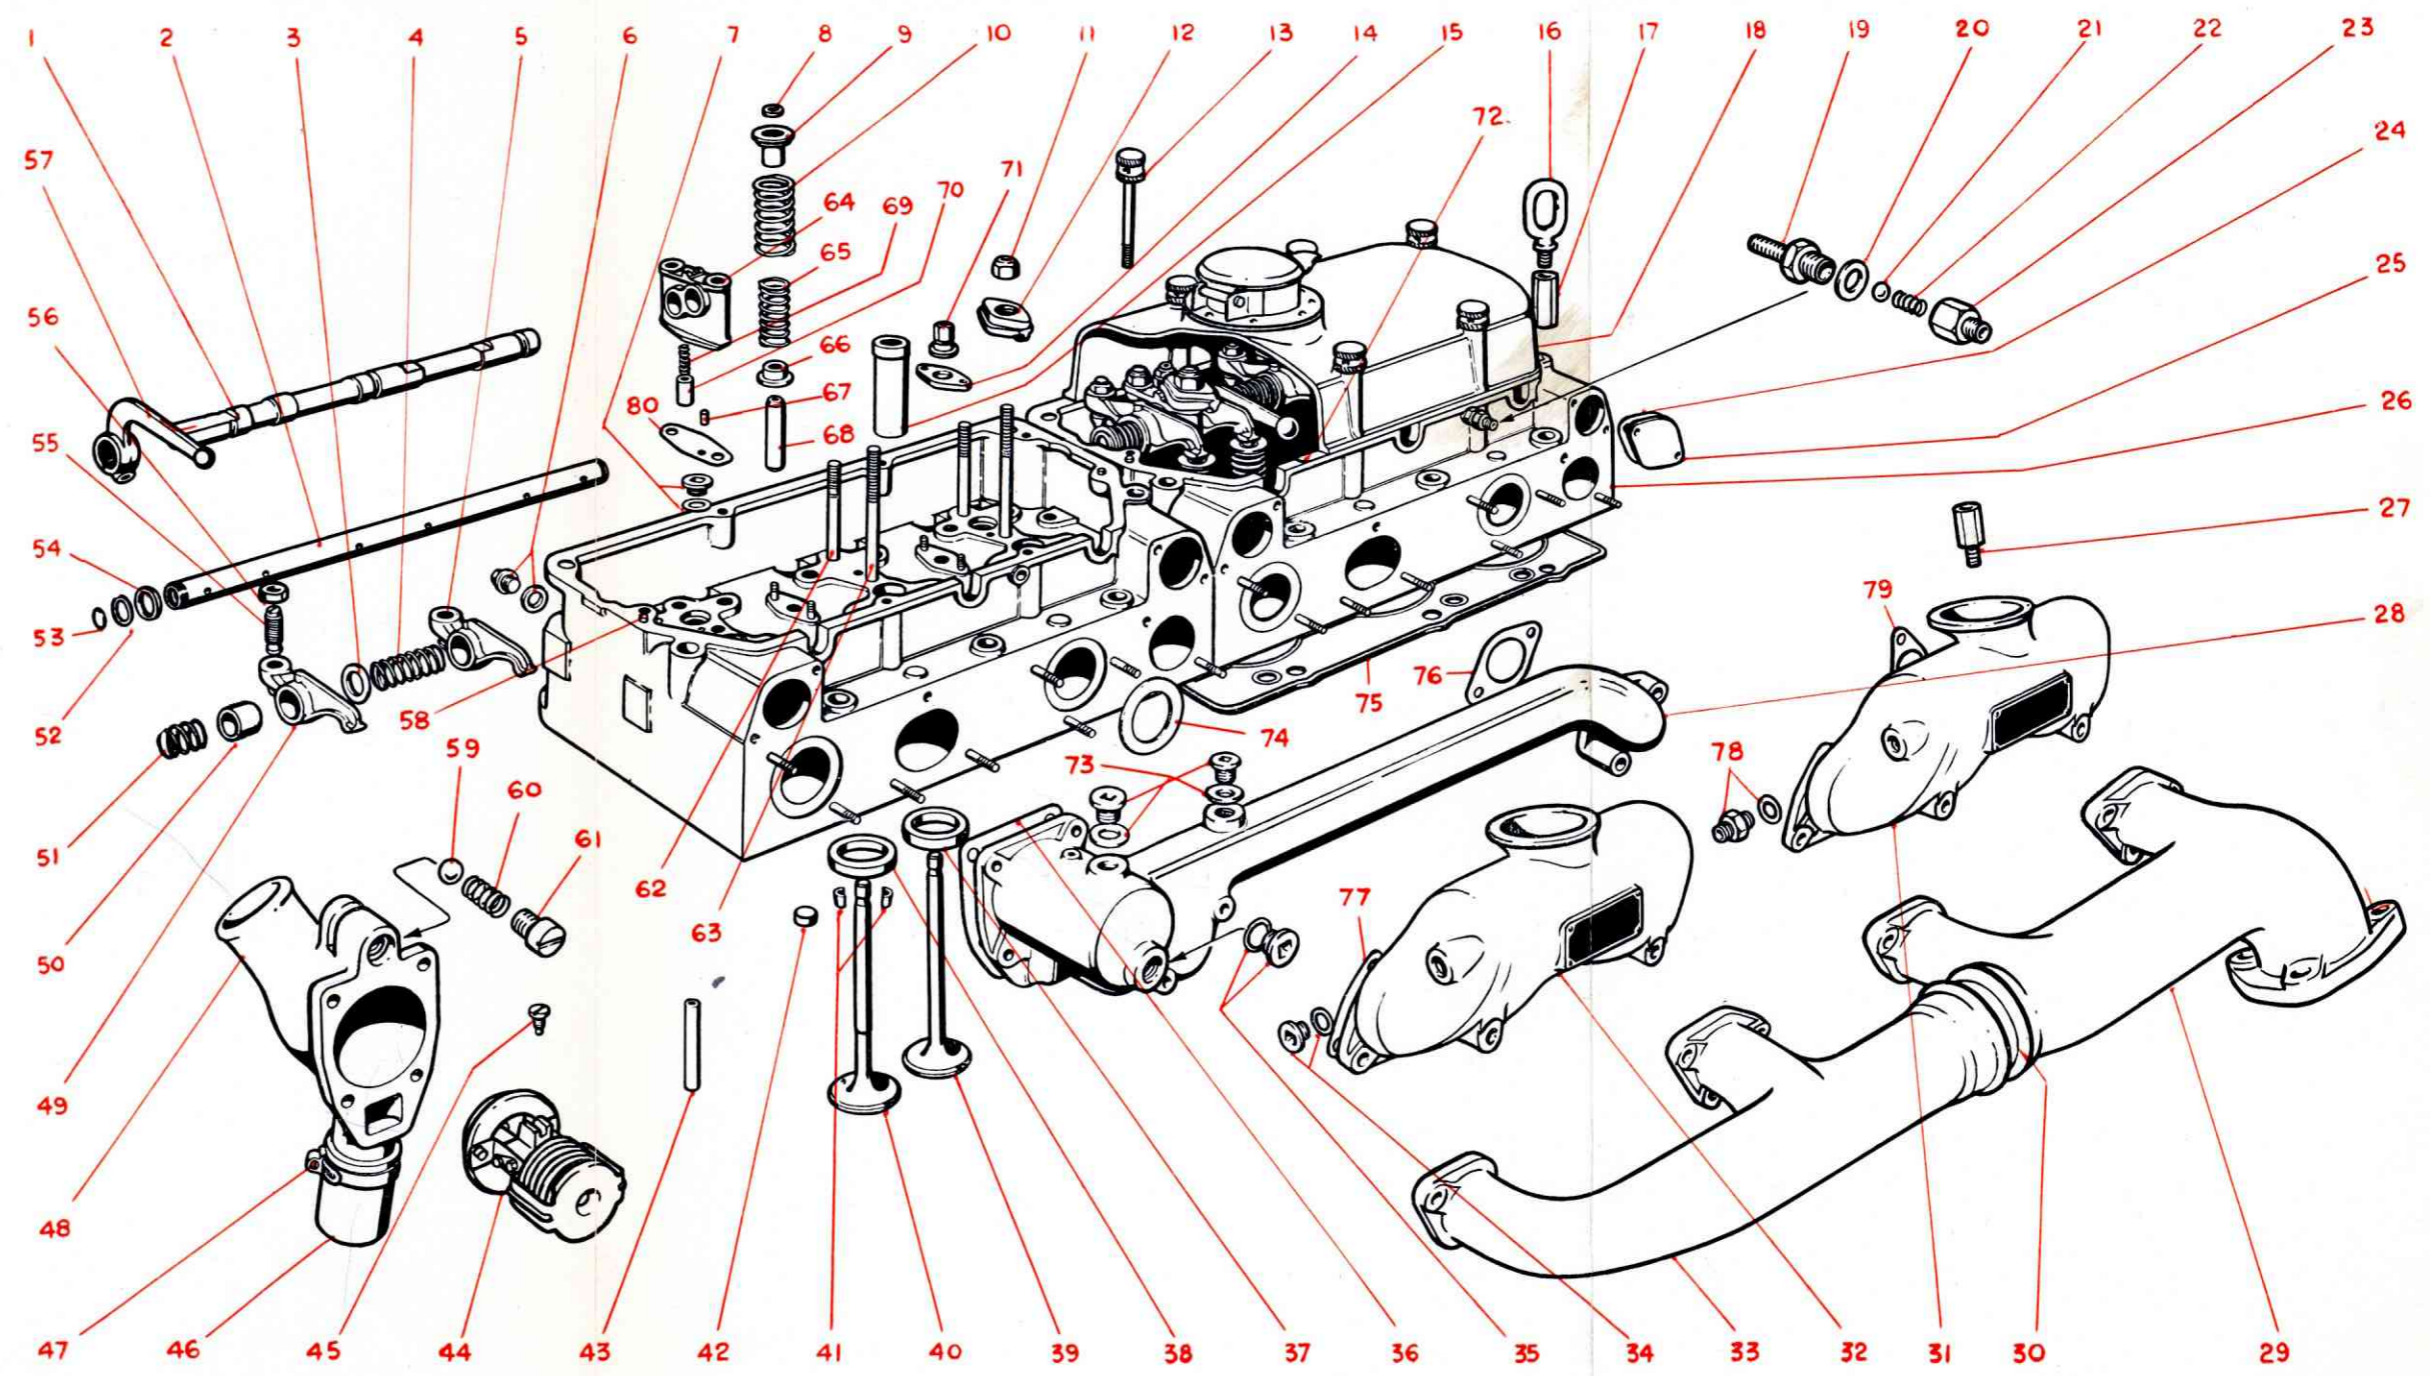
TYPICAL ILLUSTRATION OF CYLINDER HEAD COMPONENTS
